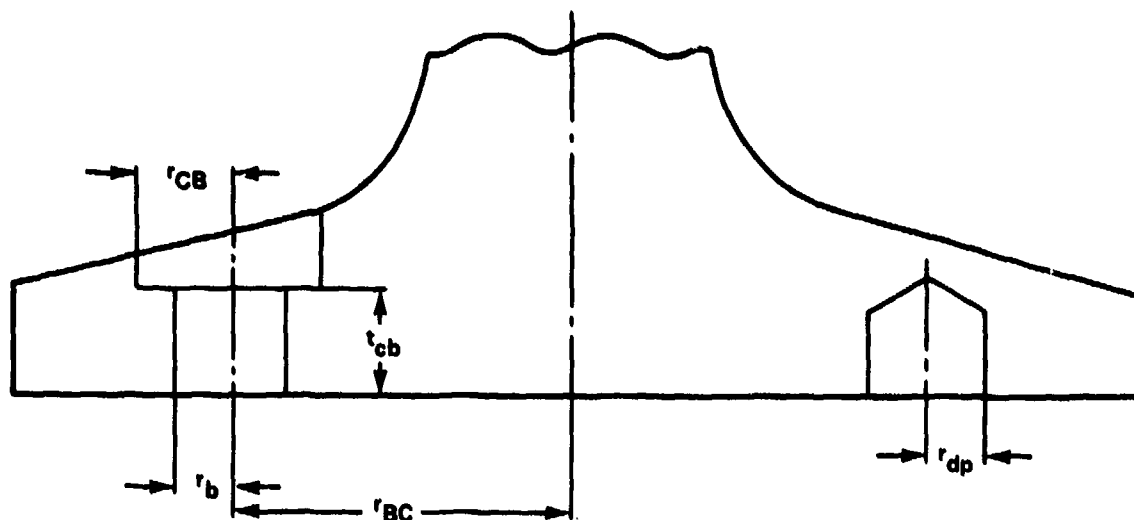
Dimensions Used in Table 8 for Blade Flange
